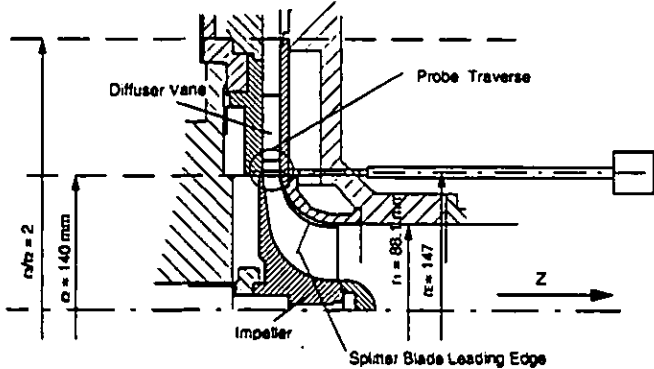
Cross-sectional view of the centrifugal compressor with FRAP<sup>®</sup> probe
